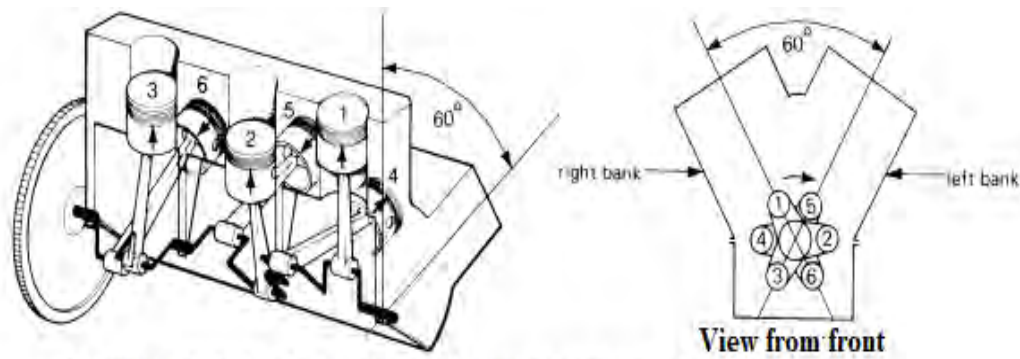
Cylinder and Crank arrangement for V6 Engine
